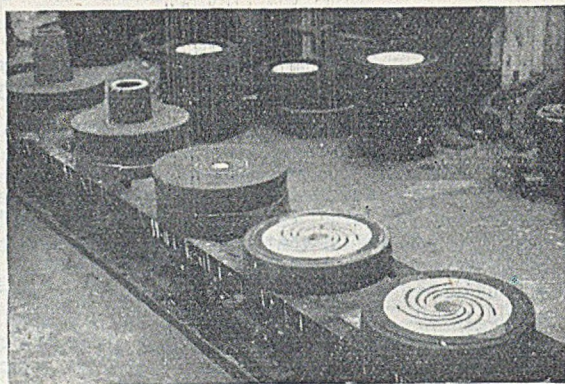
Impellor Moulds Assembled with Core Paste.
